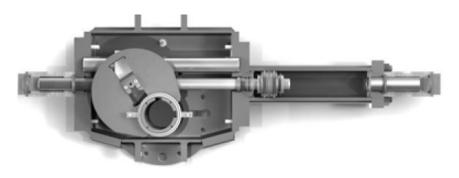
Double Acting LHS/LHH Actuator Configuration: Open Position
